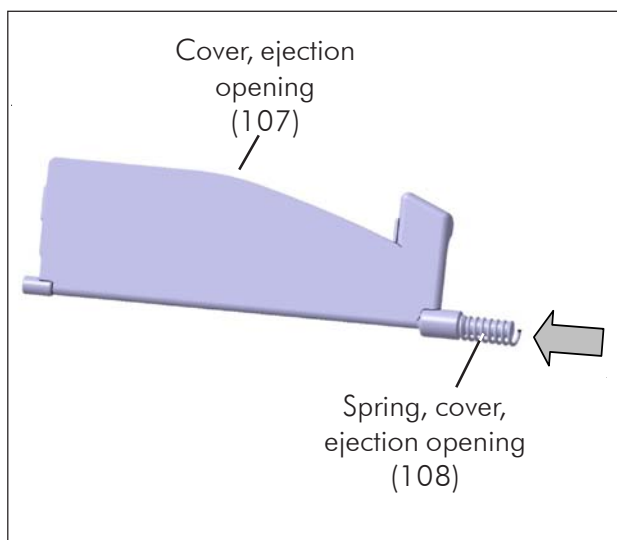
an - Reassembly of the spring, cover, ejection opening (108)
